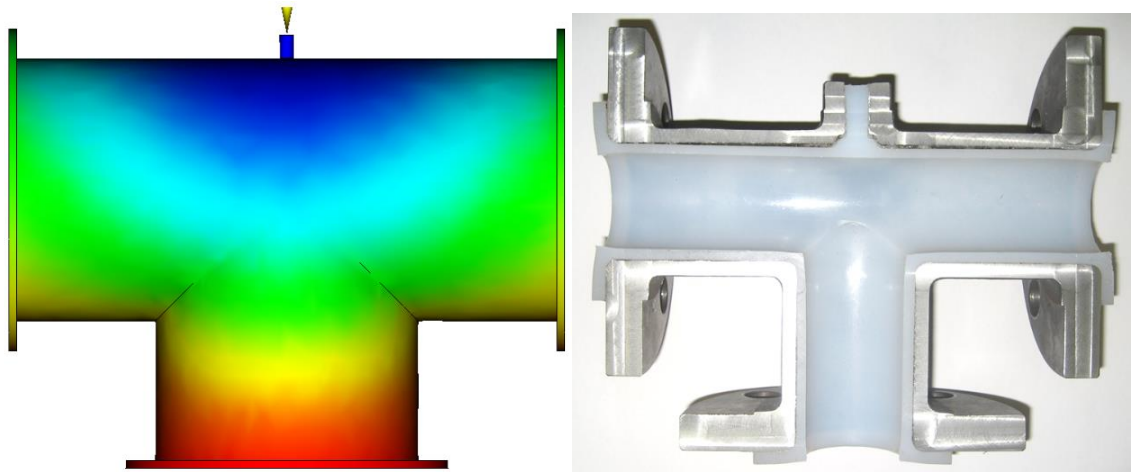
Model showing filling of a fitting created on Autodesk Simulation Moldflow (left) and photo of a fitting sectioned to show the liner (right)
